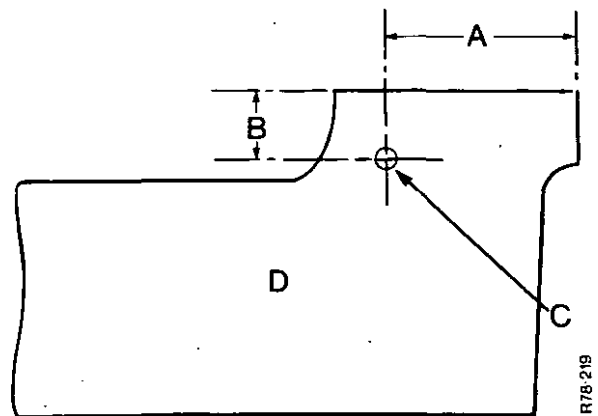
SIDE VIEW OF GEARBOX COVER
